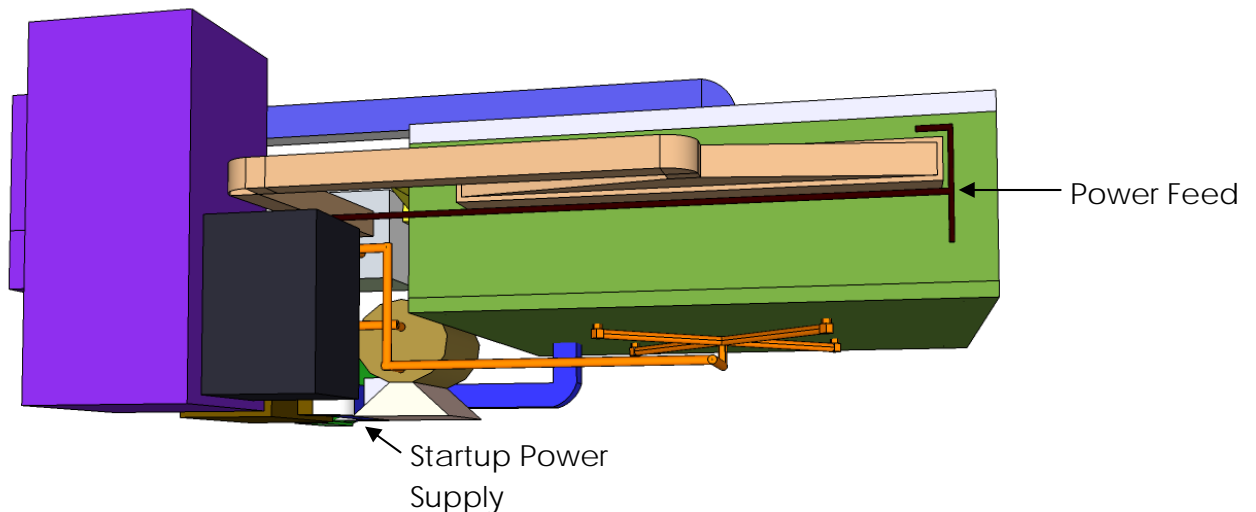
Side View of Control Assembly, Startup Power Supply and Power Feeds
